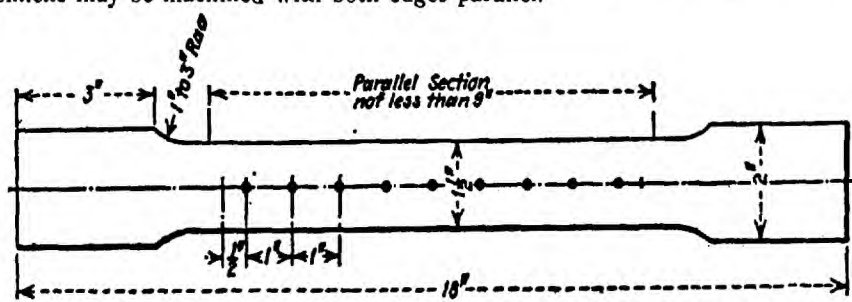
Standard Form of Test Specimen Required for All Tension Tests of Plate Material.
